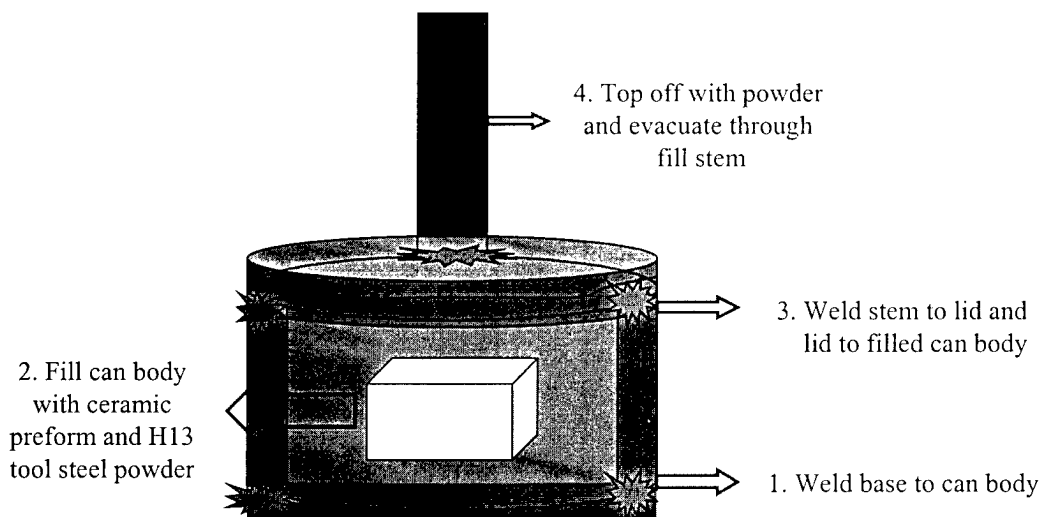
Schematic of the HIP “can” assembly employed in this study.
